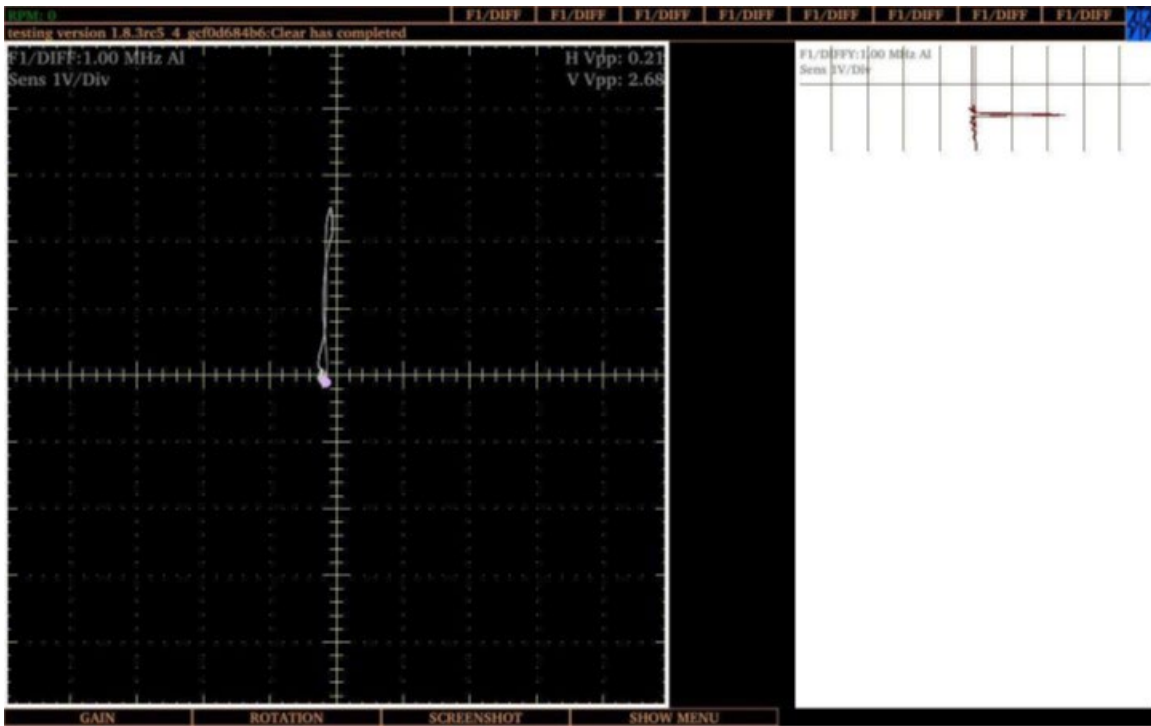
ET indication of defect at Location E in butt weld test panel TTCl-2
